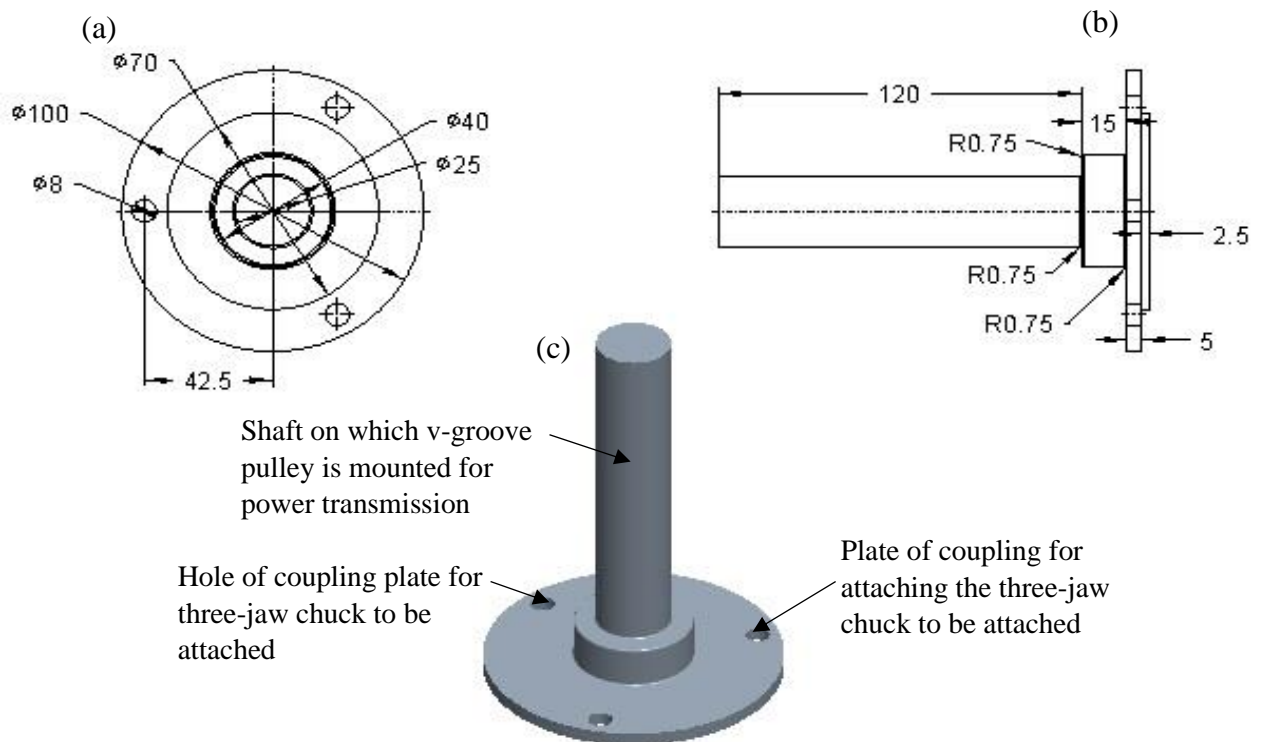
(a) Top view (b) side view, and (c) 3-D CAD model of the coupling shaft for its fabrication.
